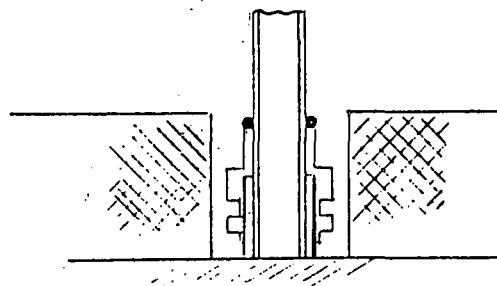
FITTING "O" RING SUPPORTS AND GLASS TUBE IN THE RECEIVER ASSEMBLY PROCESS
